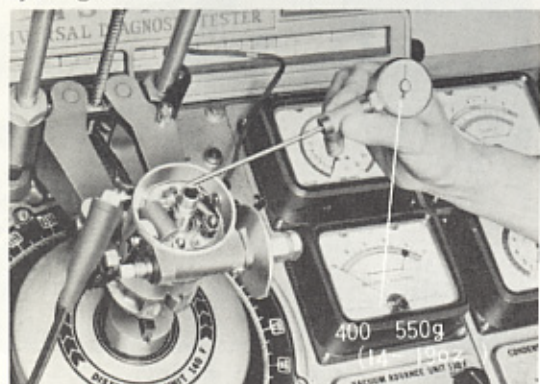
Checking Breaker Point Spring Tension W0869
